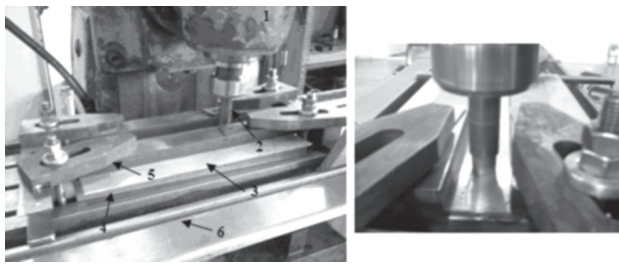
FSW applications on conventional vertical milling machine; 1 milling head, 2 welding tool, 3 aluminum plates, 4 Steel backing plate, 5 clamping setup, 6 machine table
